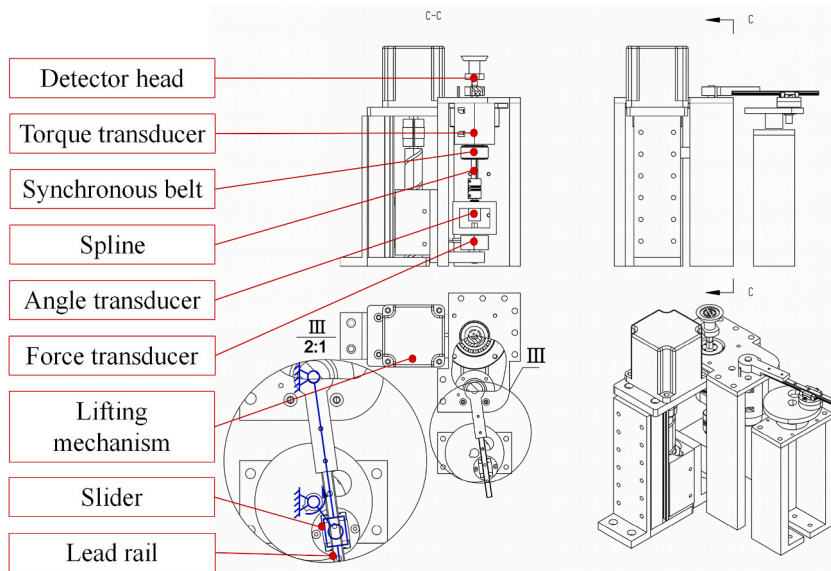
The kinematic sketch of the mechanical structure of the horizontal torsion reciprocal motion mechanism.
